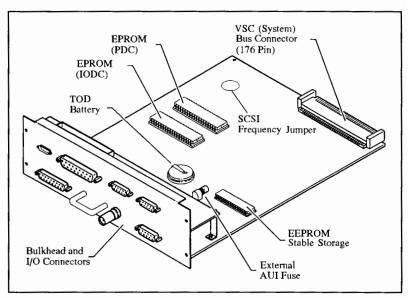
Replaceable Parts on the System (core I/O) Card
